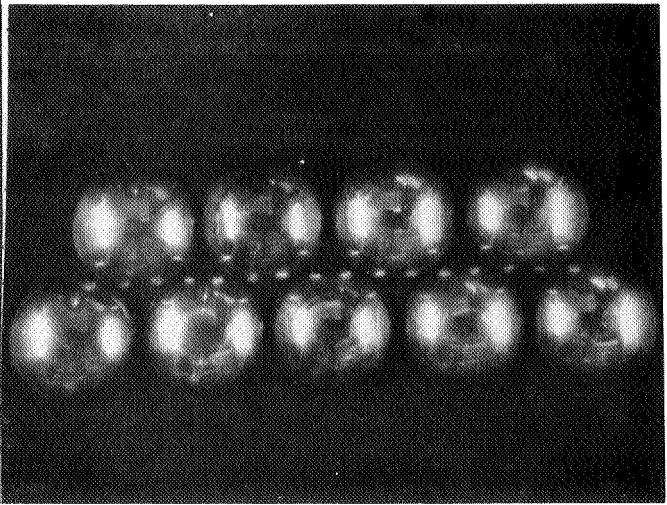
Pheldor 10 Shoes and Thrust Bearings and M-2 Swash Plate As Received in Pump S/N X-1803
